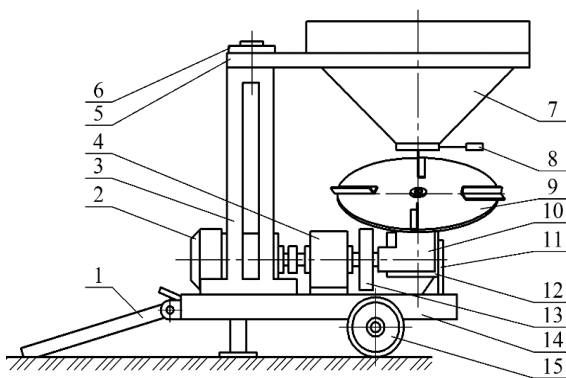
Schematic model of experimental unit for research into mineral fertiliser spreading: 1 – transporting bracket; 2 – electric motor; 3 and 5 – sliding and turning frames, respectively; 4 – chain variable-speed gear; 6 – frame turn swivel; 7 – bin; 8 – slide valve; 9 – fertiliser spreading tool; 10 – bevel-gear speed reducer; 11 and 12 – brackets; 13 – free-wheel clutch; 14 – main frame; 15 – carrier wheel.
